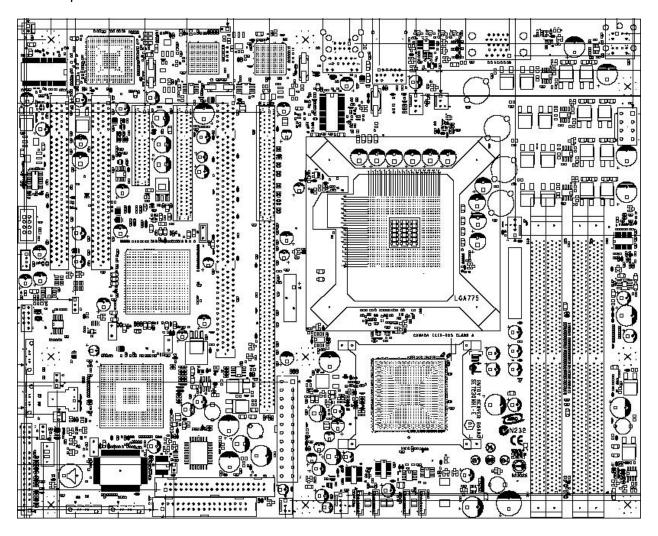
Intel[®] Server Board S3000AH Mechanical Drawing
